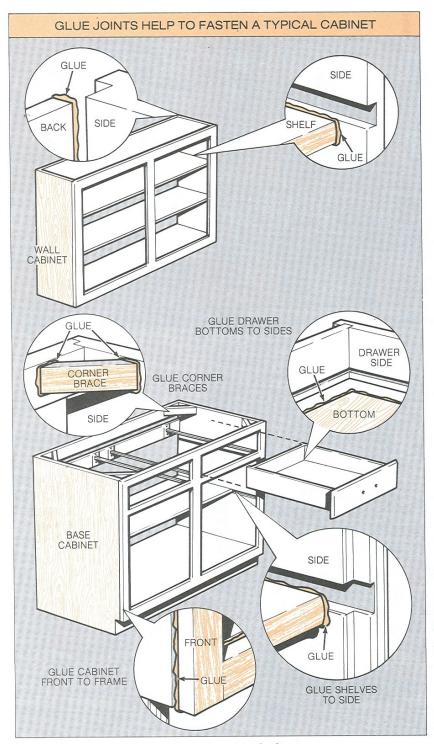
Glue is used to help fasten the joints of cabinets.
